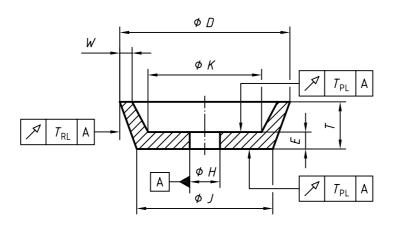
Taper cup wheel, e.g. as specified in ISO 603-6
